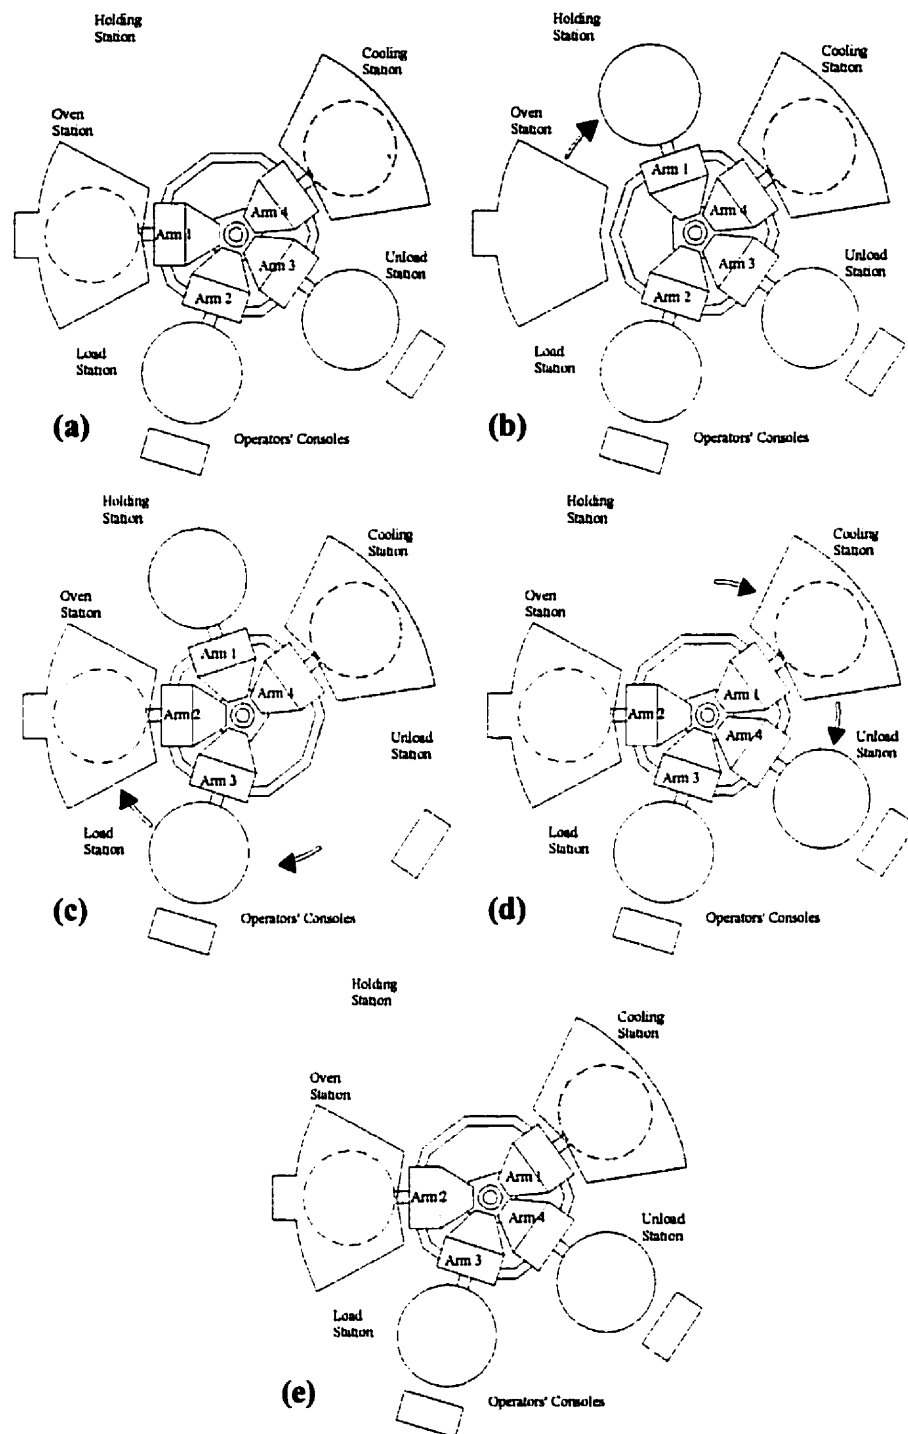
Typical Schematic of a Four-fixed-arm Rotomolding Machine
